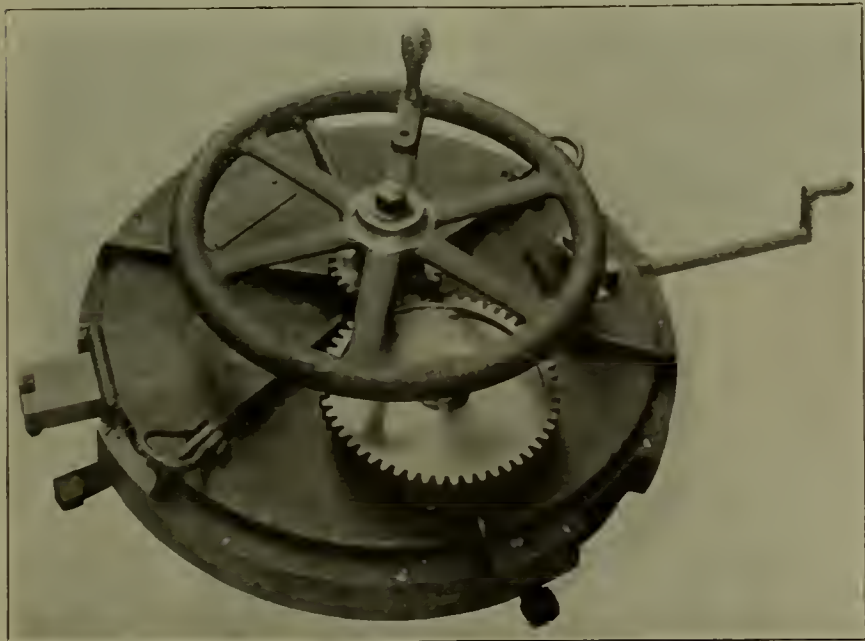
MACHINE FOR FACING CYLINDER HEADS AND DOME JOINTS.
